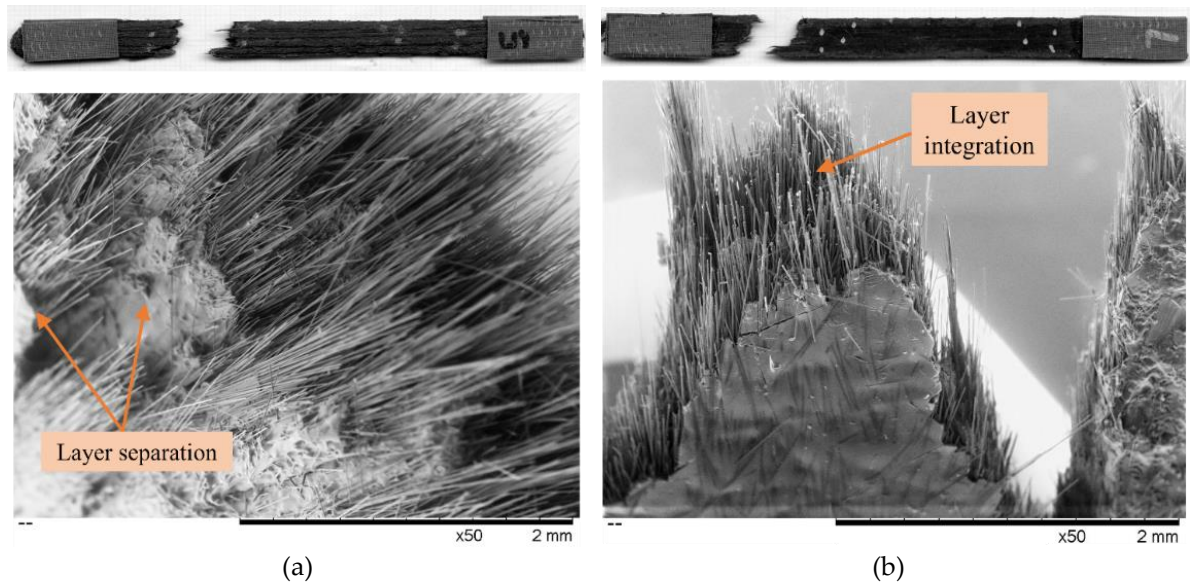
SEM image of tensile fracture surface: (a) as-printed; (b) post-printing consolidation.
